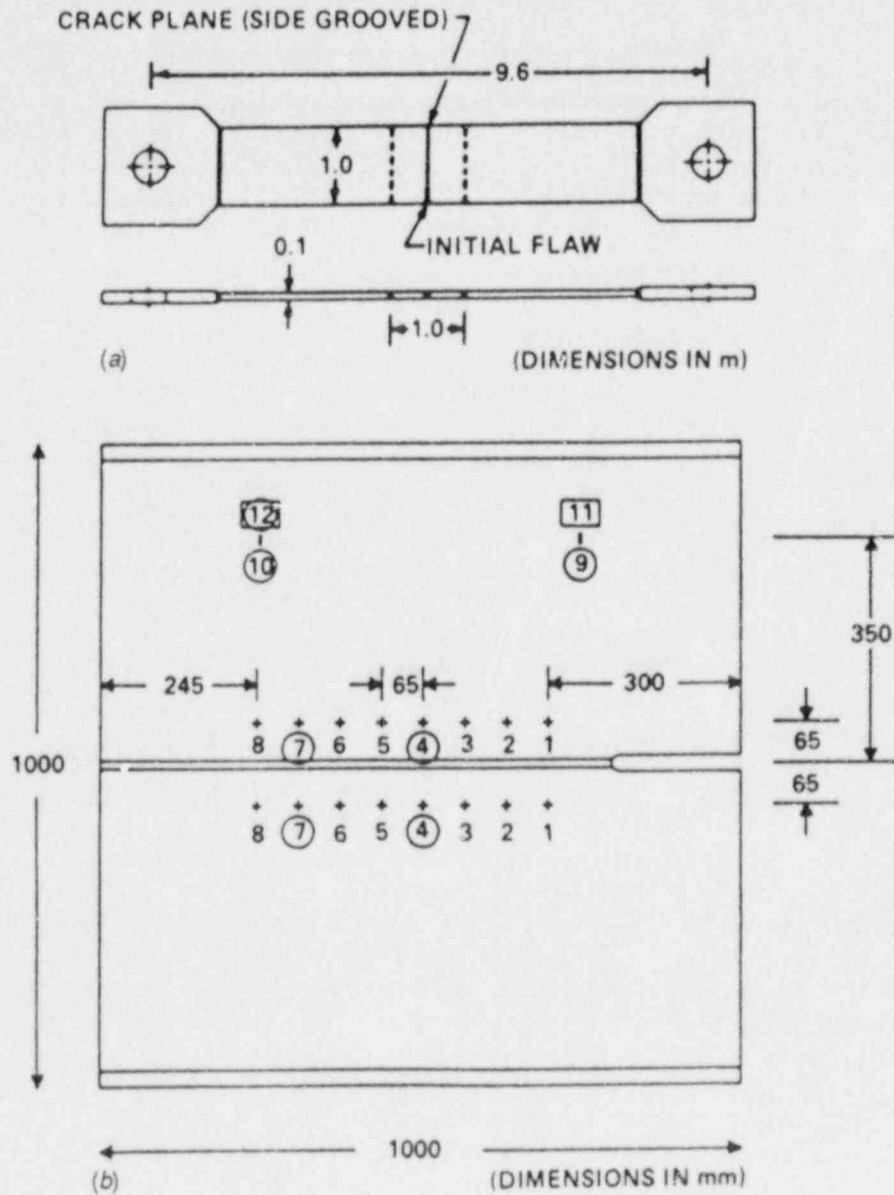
Wide-plate assembly and crack-arrest specimen. (a) Pull-plate assembly, (b) specimen with strain-gage locations.
